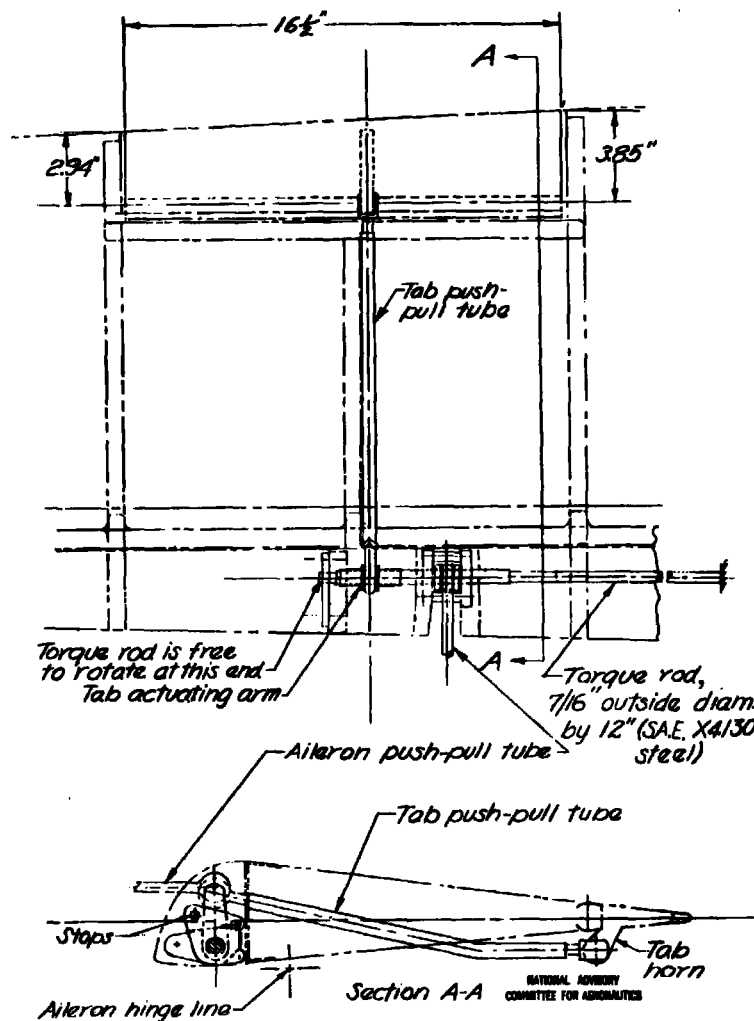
Spring-tab-aileron arrangement of P4F-3 airplane.
